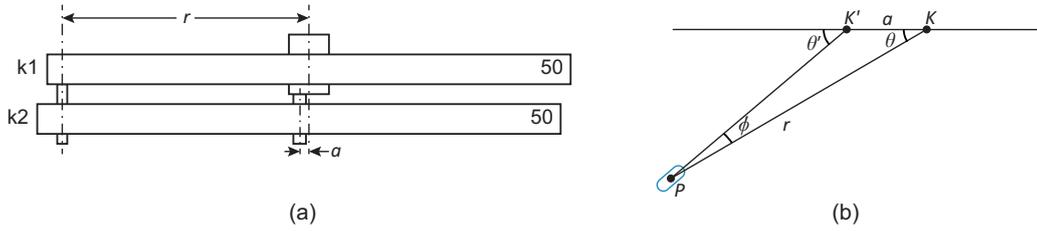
The Pin and Slot arrangement of a gears K_1 - K_2 : (a) Sectional diagram and (b) Pin&Slot parameters.
